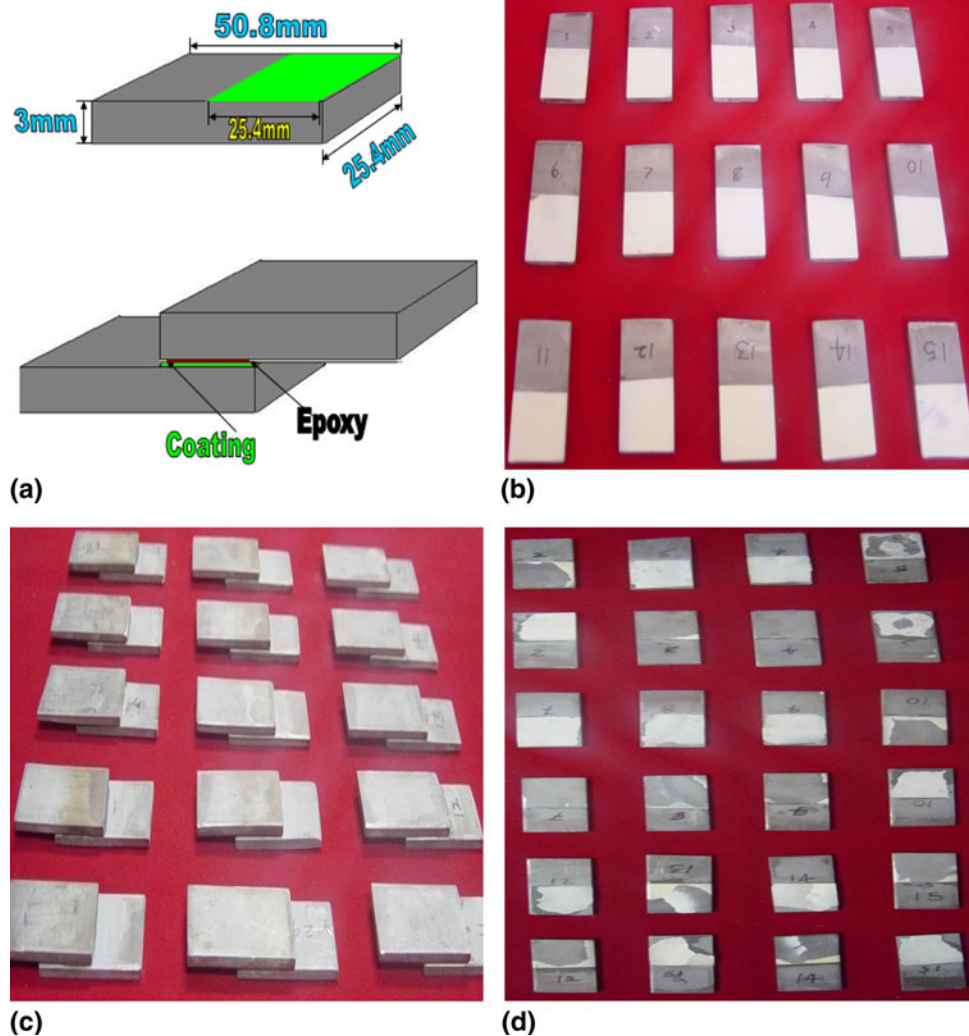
Details of lap shear bond strength test. (a) Dimensions of lap shear bond strength test specimens (EN 1465). (b) Coated specimens for lap shear bond strength test. (c) Epoxy bonded specimens for lap shear bond strength test. (d) Specimens after lap shear bond strength test
